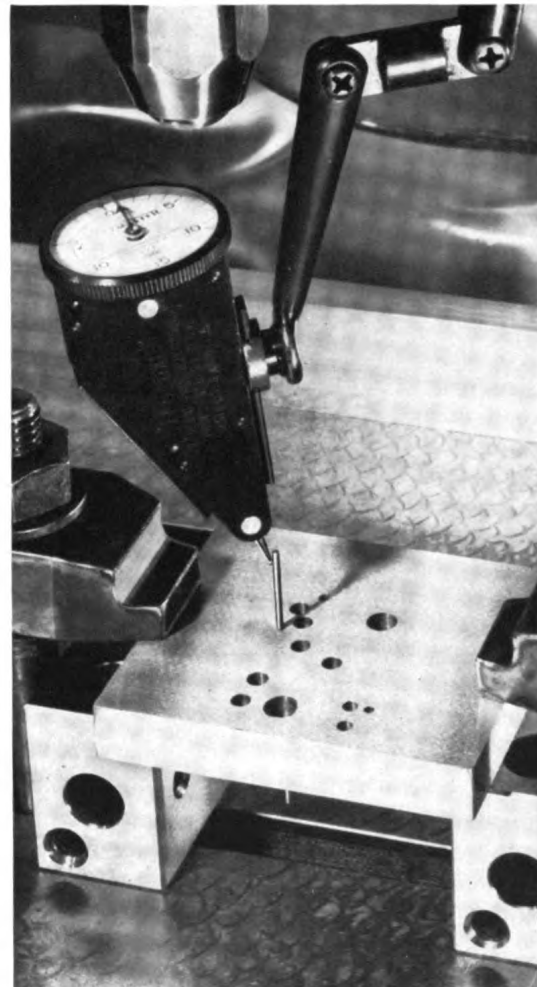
Lean of holes too small to probe with an indicator is detected by use of a fitted pin.
